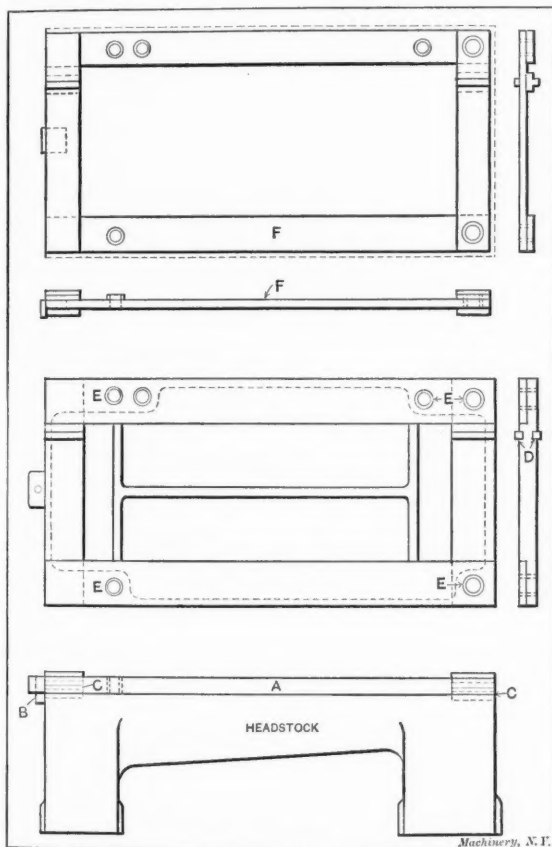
Application of a Wooden Jig for Drilling a Lathe Headstock. At *F* is shown a Similar Jig constructed of Flat Bar Steel
